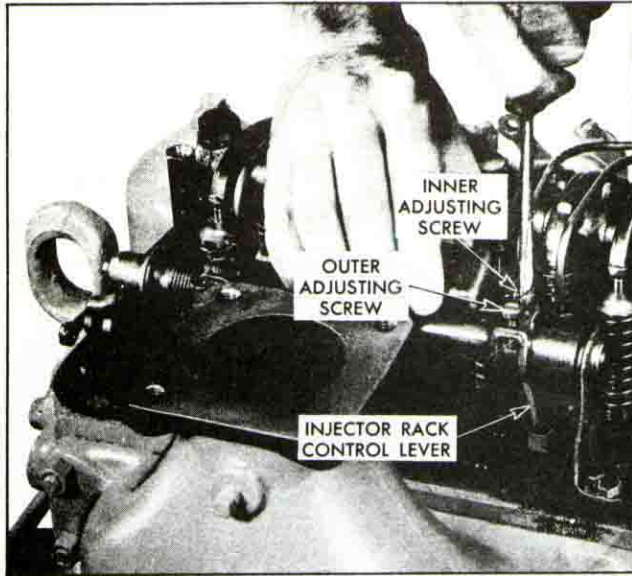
Positioning No. 1 Injector Rack Control Lever
